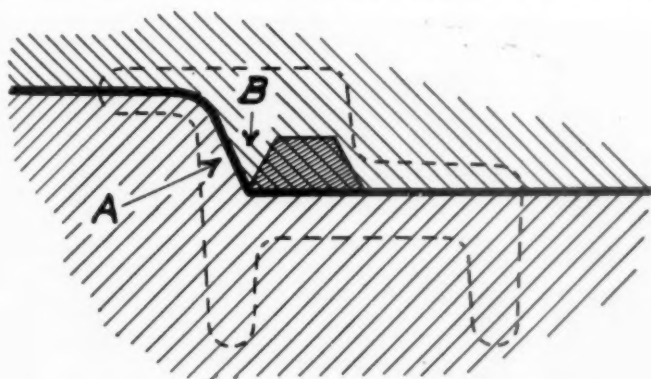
UNDESIRABLE PARTING DUE TO SHAPE OF RUNNER
